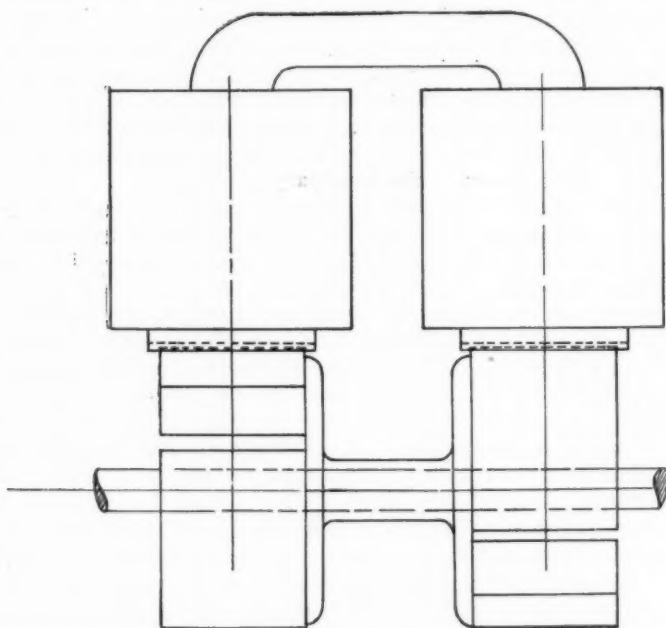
Illustrating arrangement of windings in proposed modification of generator, each pole carrying a separate coil.
